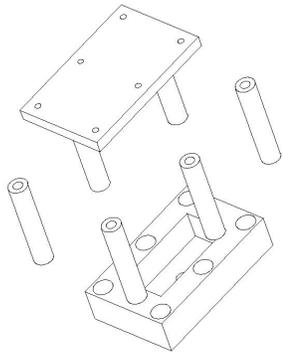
EXPLODED VIEW OF WRIST MOUNT
